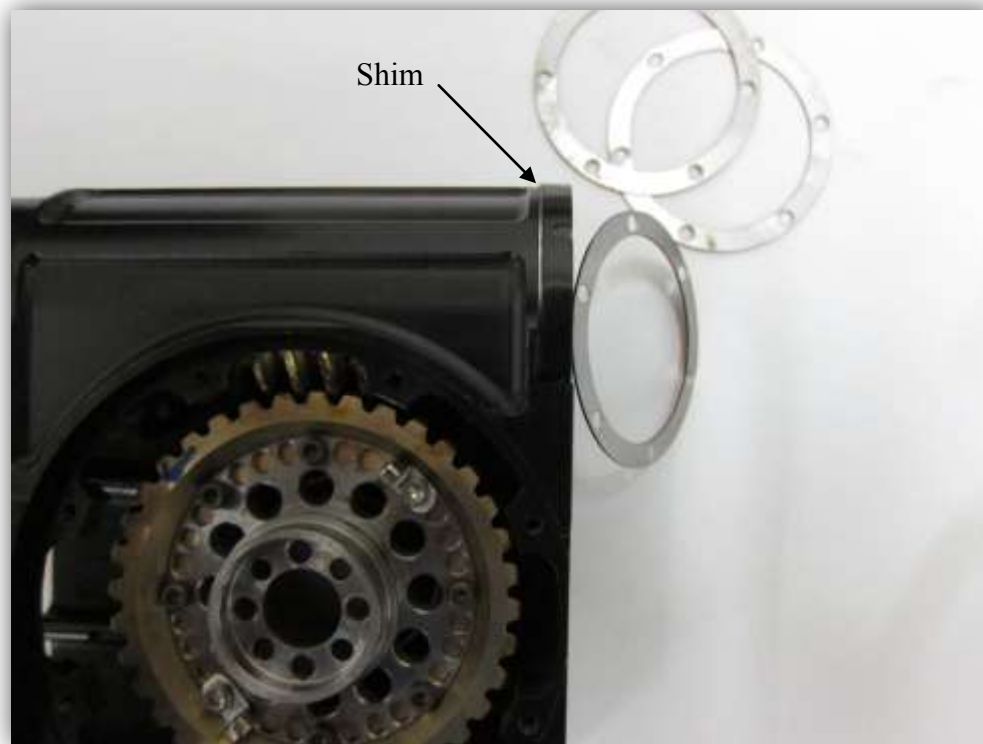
Picture of Gearbox Housing with Shim and End Cover
